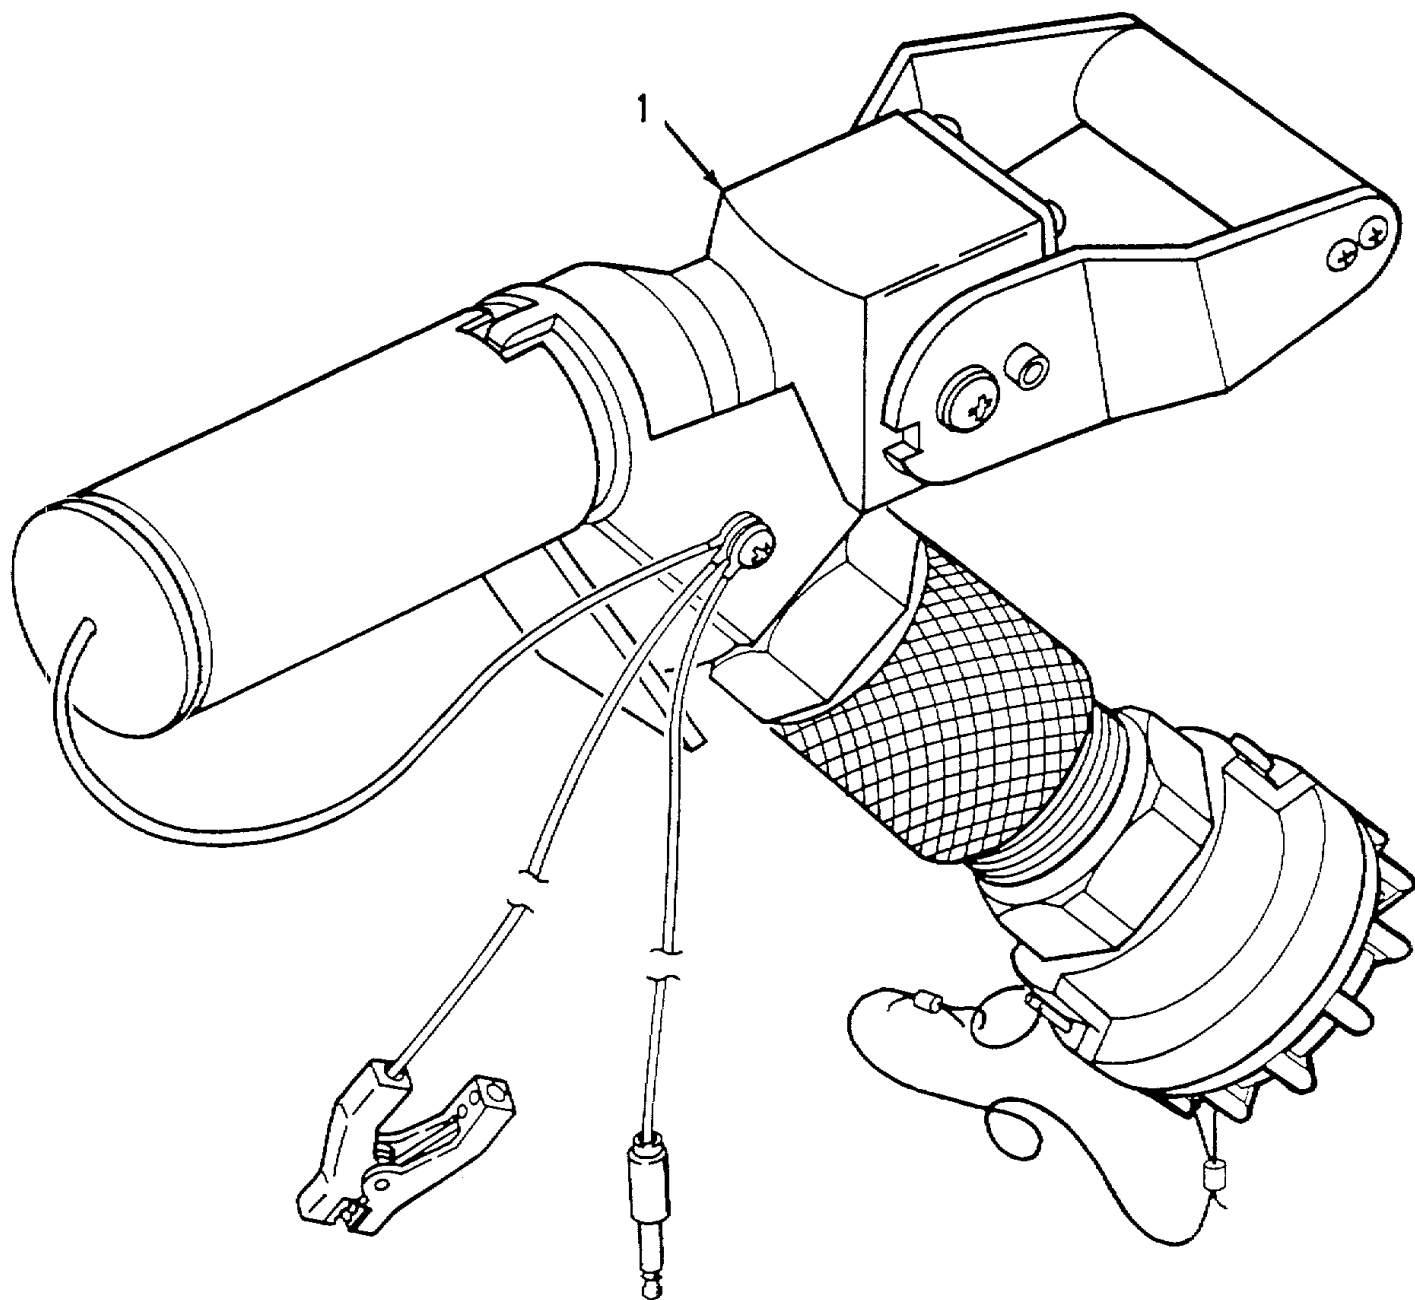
Closed Circuit Refueling (CCR) Nozzle Assembly
